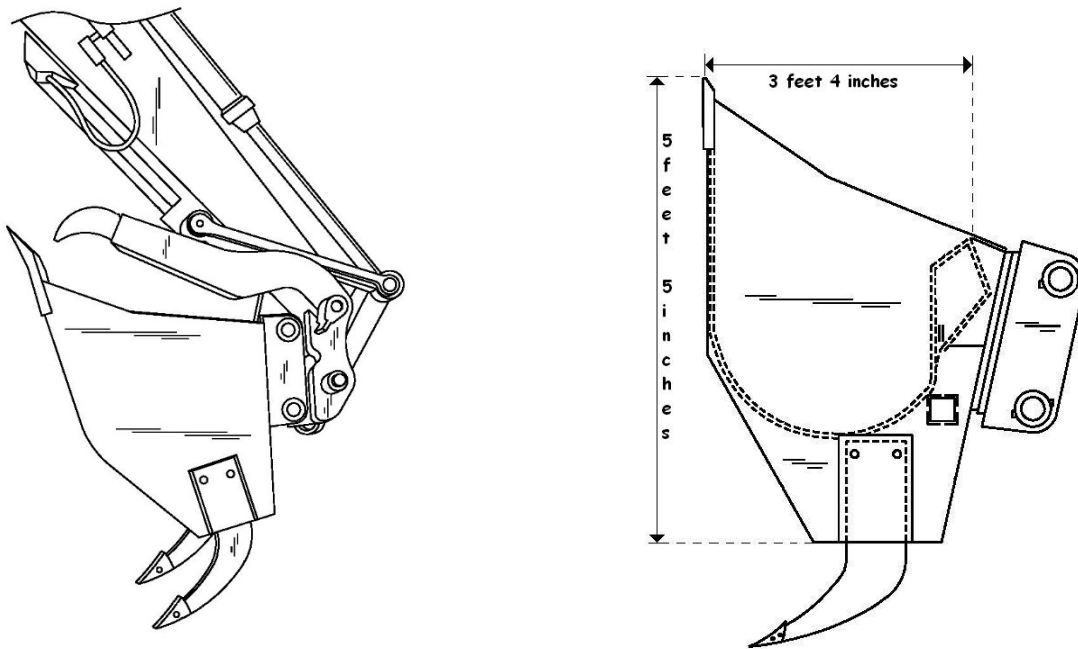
Left is a view of the mounted SEB. Right is a side view showing the bucket and dimensions of the implement.
